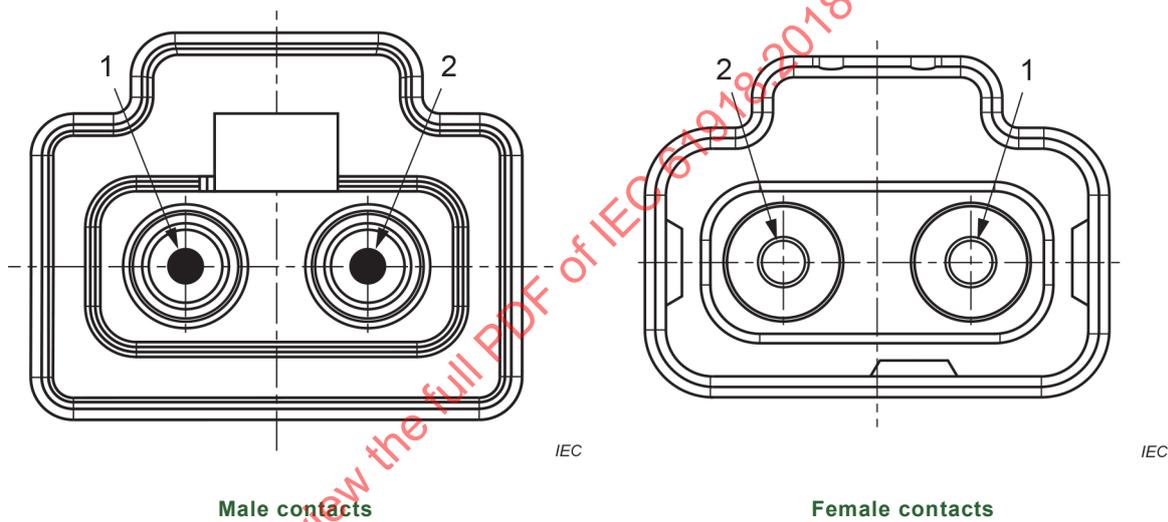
Mating parts of the IEC 63171-6 connectors
